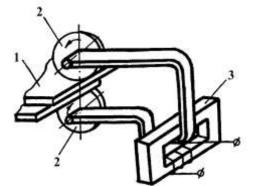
Seam welding process: 1-works; 2-electrodes; 3-transformer
